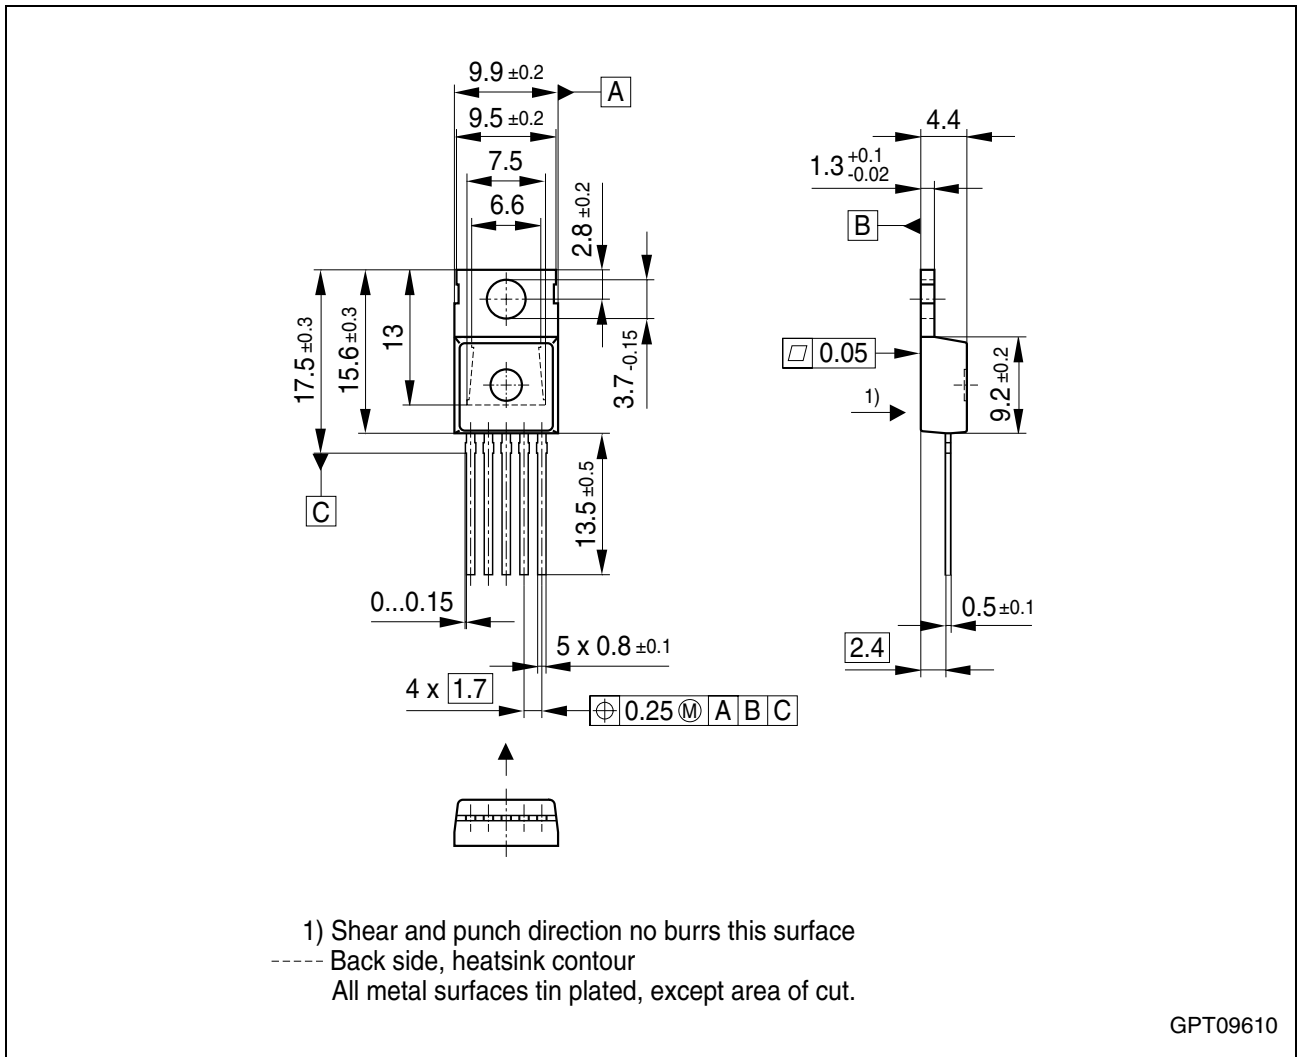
P-TO220-5-11 (Plastic Transistor Single Outline)
